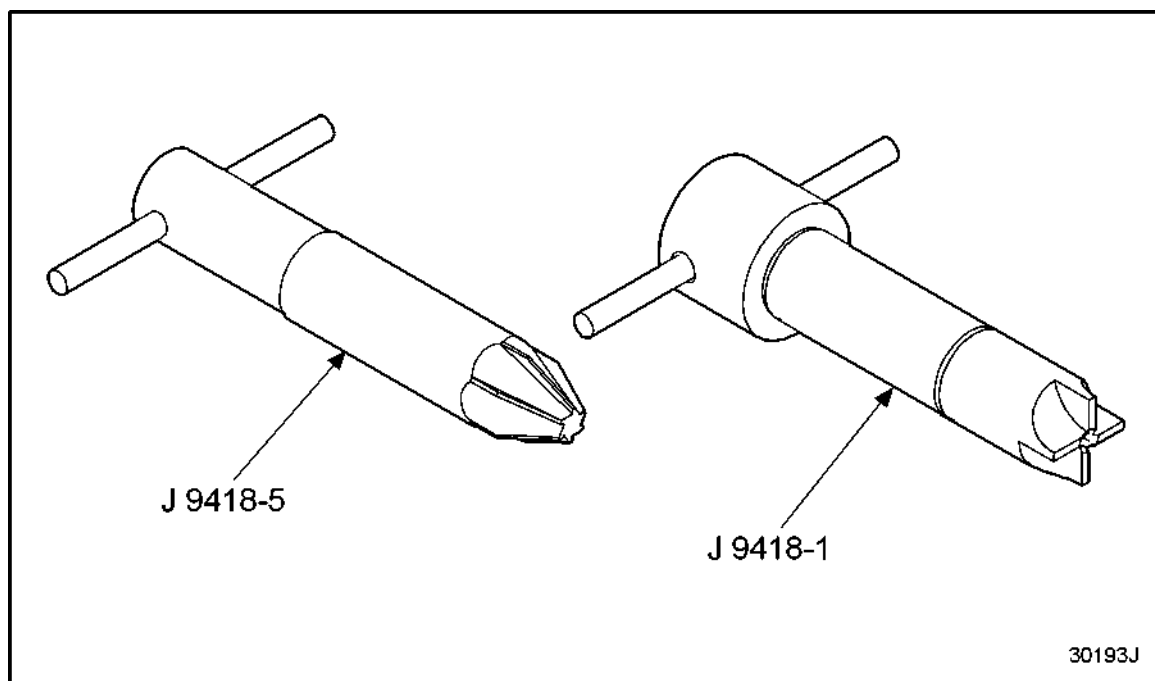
Injector Nut Carbon Remover Set J 9418
